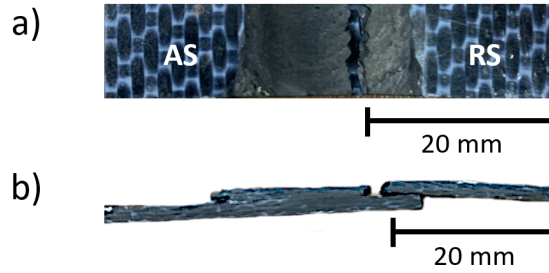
a) Top view of fractured specimen. b) Cross section of fractured specimen.
